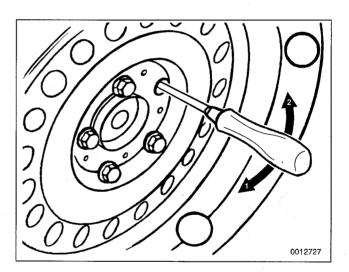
Access parking brake shoe adjuster approximately 65° to rear of vertical. Use flat-bladed screwdriver to turn adjuster. On left wheel, turn adjuster in direction 1 to expand shoes. On right wheel, turn adjuster in direction 2 to expand shoes.
